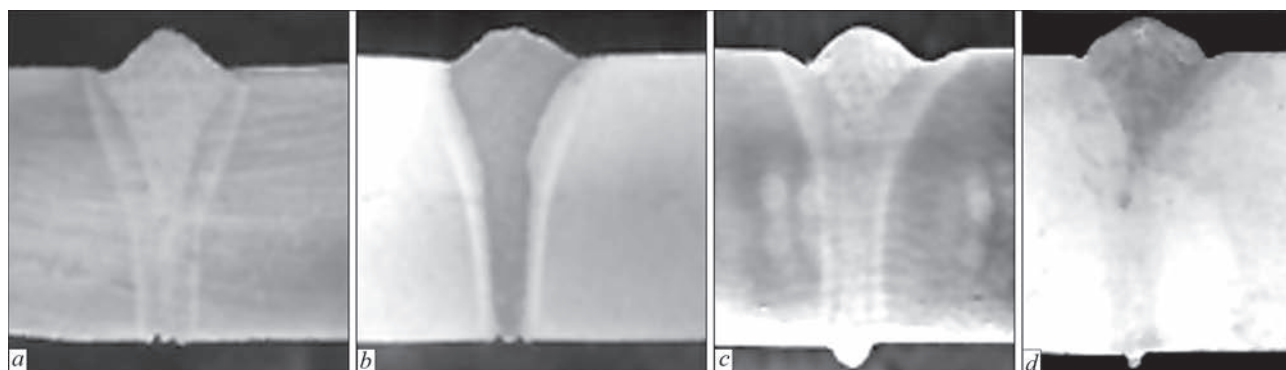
Typical defects in the formation of butt joints of high-strength steel DOMEX 390 XP ($\delta = 10$ mm) during hybrid laser-MIG welding [6]: concavity of the weld root (*a, b*), undercuts in the upper part (*a-d*)
